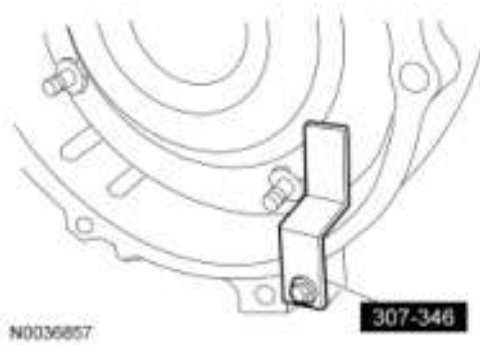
Sliding Transmission Back Far Enough To Install Special Tool (307-346)
